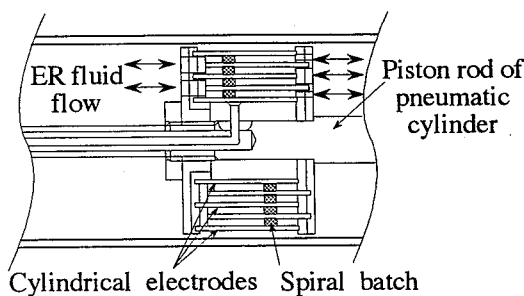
Mechanism of ER Damper. ER ダンパの構造
